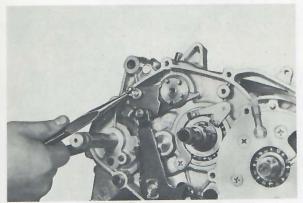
Removing gear shifting cam guide and stopper set circlip
